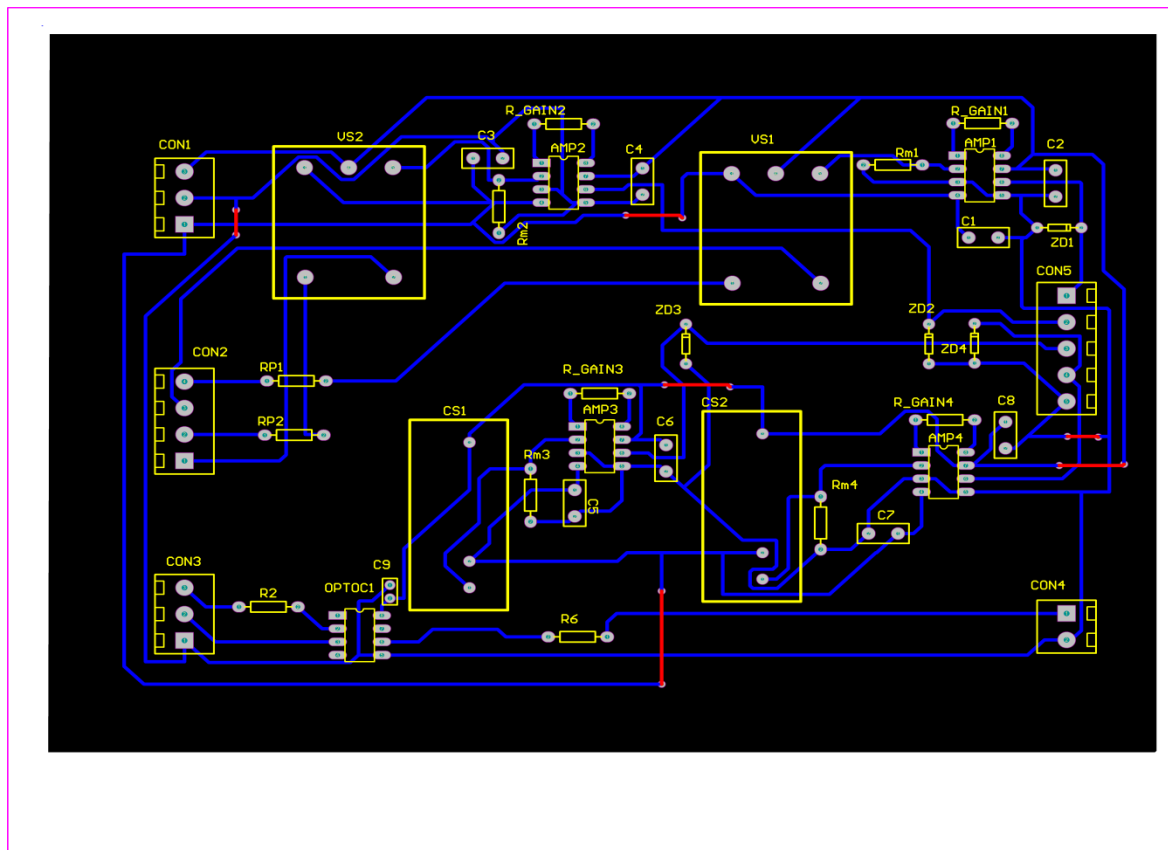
Layout drawing in Altium Designer software showing the four-channel PCB for the SEPIC converter.
